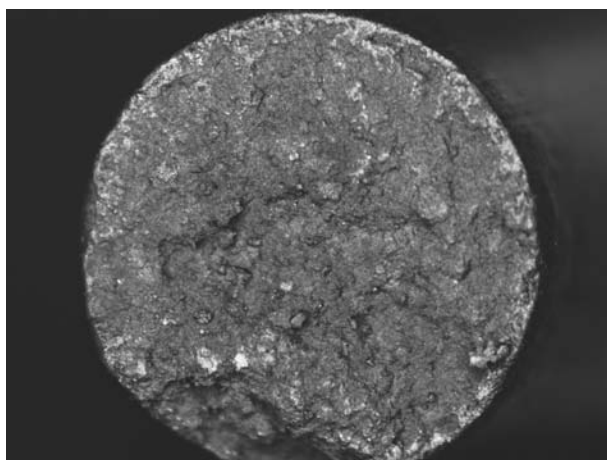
View of the fracture surface of extruded at 140°C S10S60SA materials
